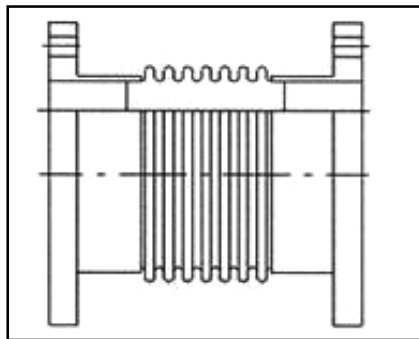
A flexible metal bellows expansion joint such as this could be used in place of a welded connection between an oil supply line and the gearbox casing.
